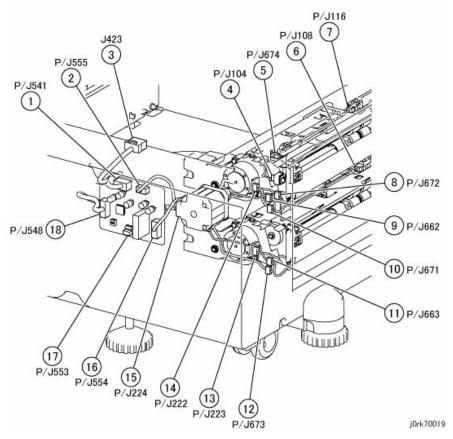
Tray3/4 Feeder, Tray Module PWB, TM Take Away Motor
